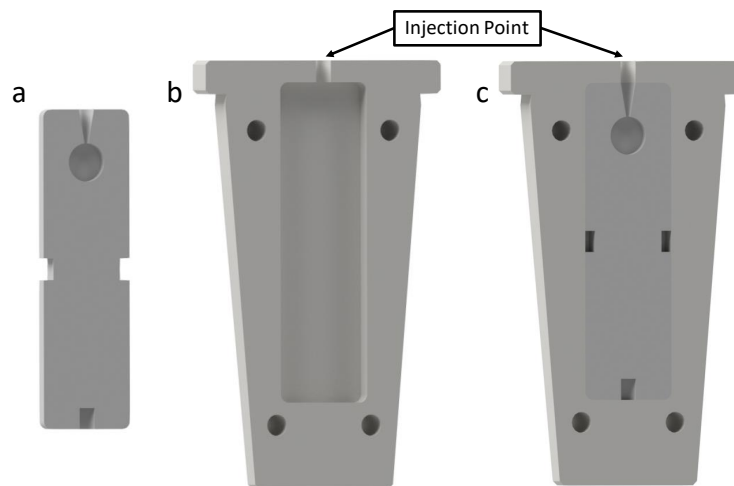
Schematic of the tooled steel mould with a printed mould insert produced via SLA 3D printing with a) printed mould insert b) tooled steel mould and c) printed mould insert in tooled steel mould. Depicted in each sub-figure is one half of the mould. The final mould is comprised of two halves.
